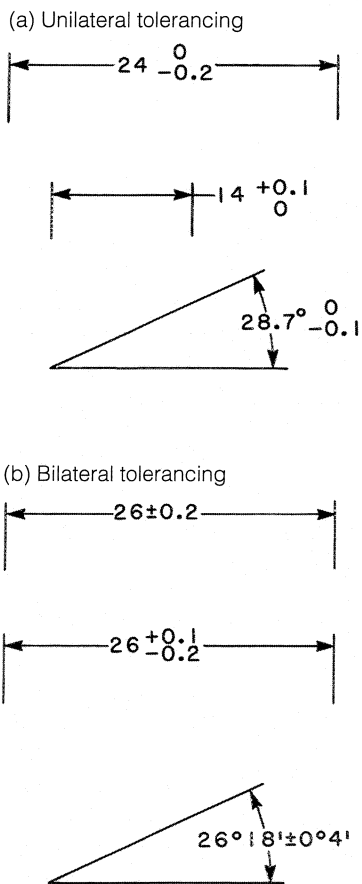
Plus-or-Minus Tolerancing on Dimensions
